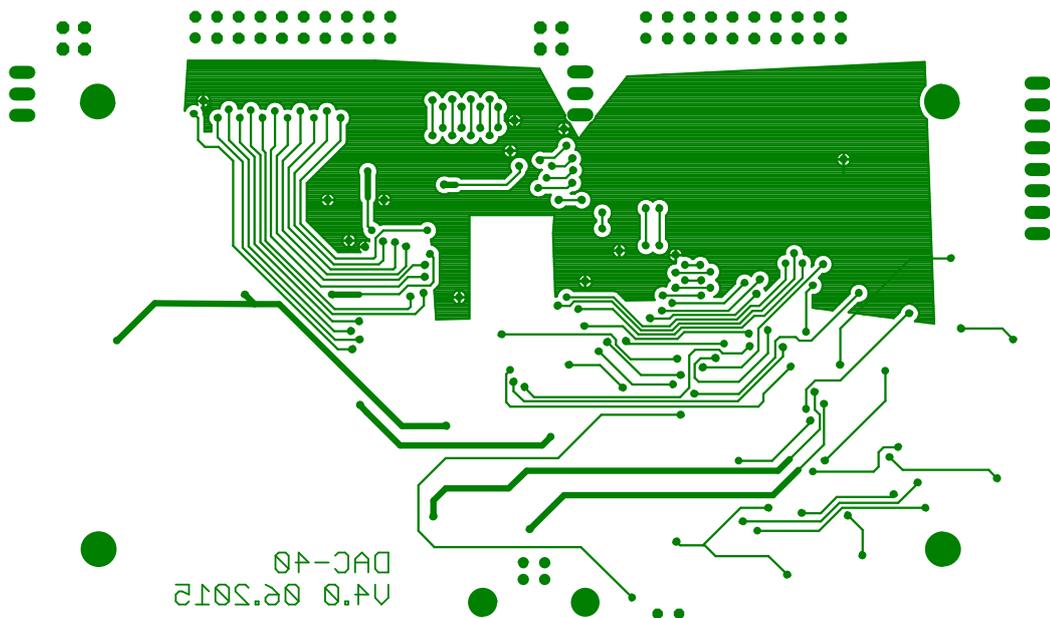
The bottom copper layer of the PCB, visualized using the Gerber files.
